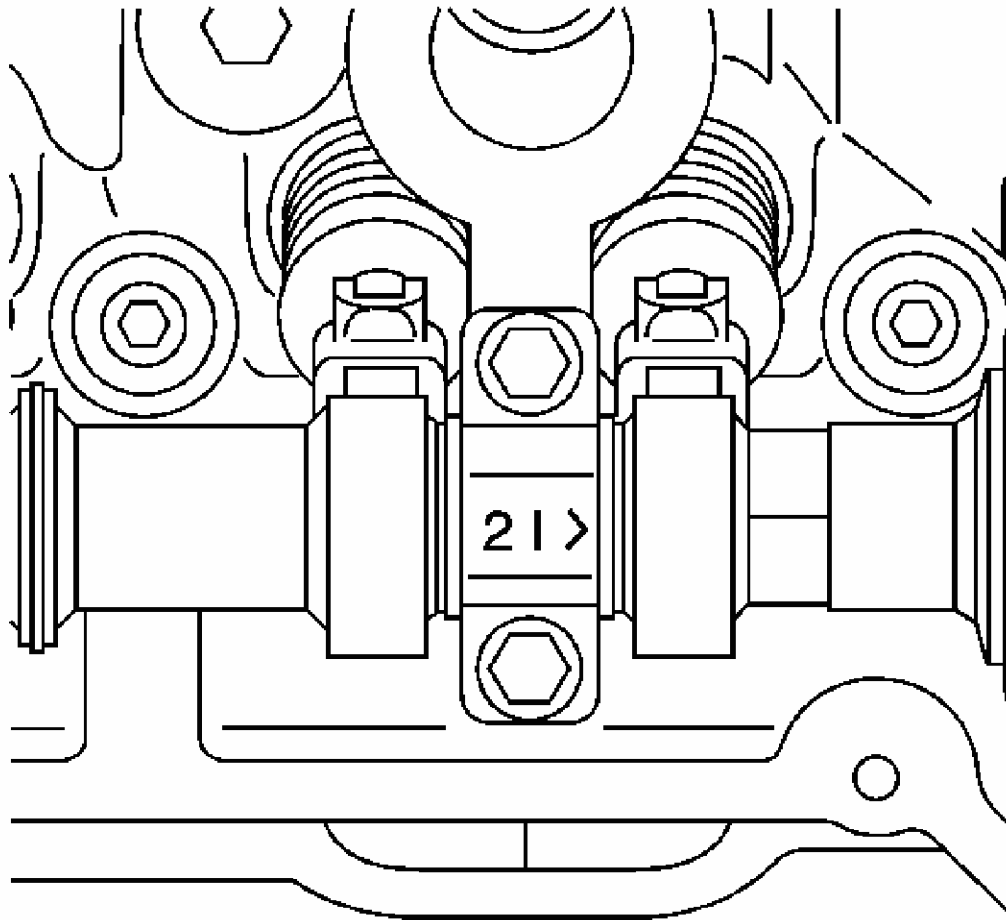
View Of Intake Camshaft Bearing Cap Markings
